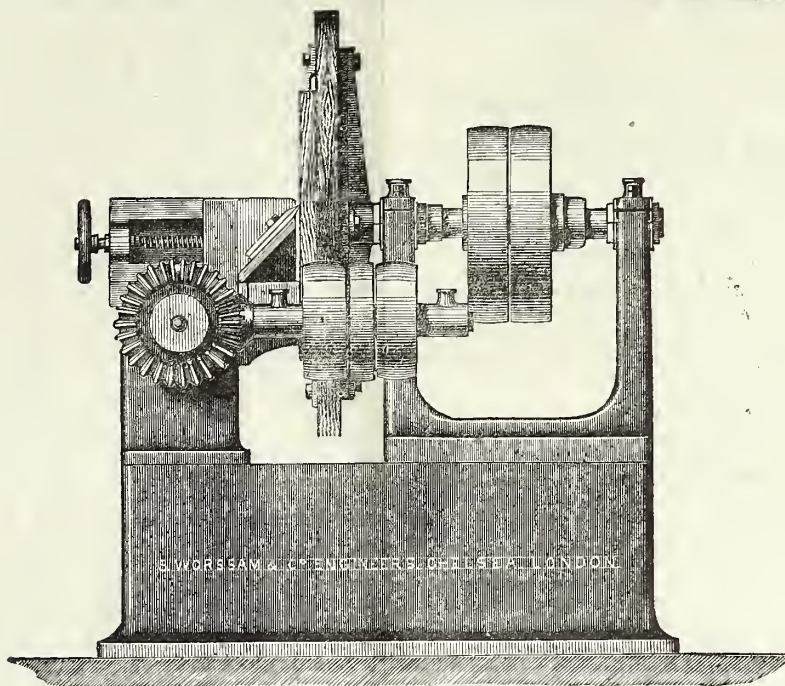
WORSSAM AND Co.'s PARQUETRY SURFACING MACHINE.
